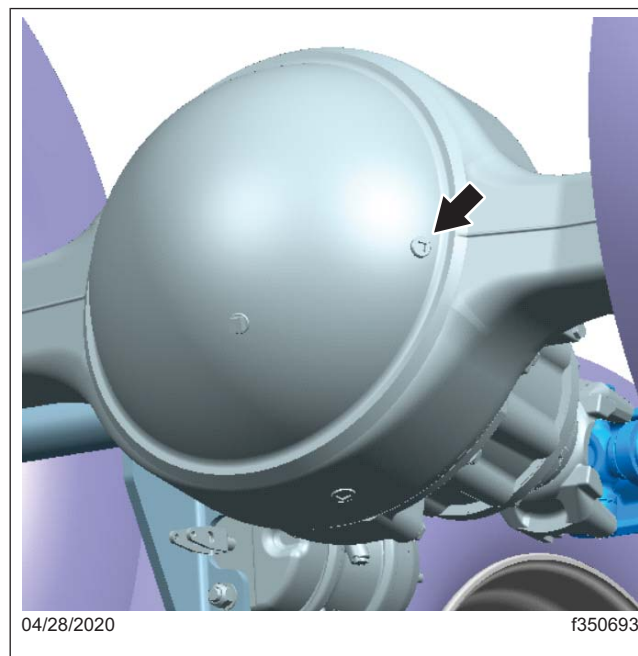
, Detroit™ New Final Drive Forward Axle, Oil Fill Location
